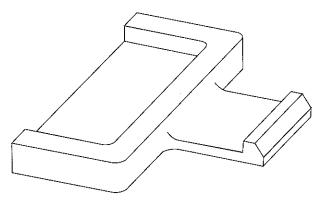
Snap-fit cantilever beams are often used in injection-molded parts to facilitate assembly.
